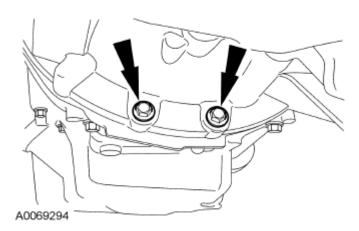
Locating Rear Nut And Engine Support Crossmember Courtesy of FORD MOTOR CO.
